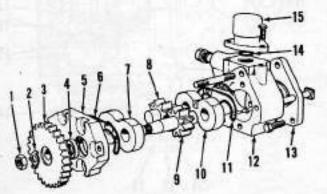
Exploded view of rear mounted hydraulic pump used for 1190 and 1230 models.
